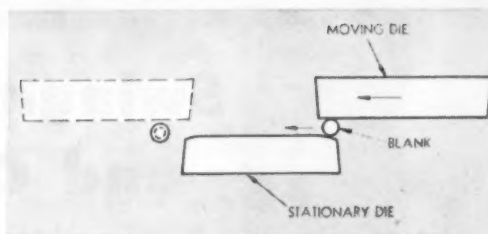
In reciprocating types of thread rollers, two flat dies are used—one stationary and one moving with the rolling faces of the dies located opposite each other.
